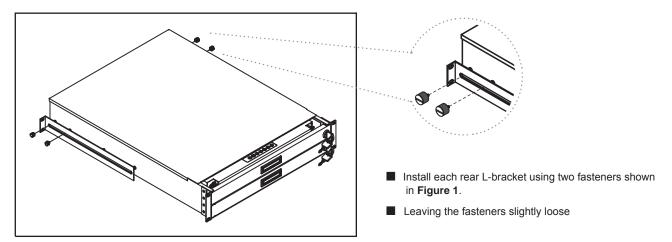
Installing the rear L-bracket to the LCD keyboard drawer.
